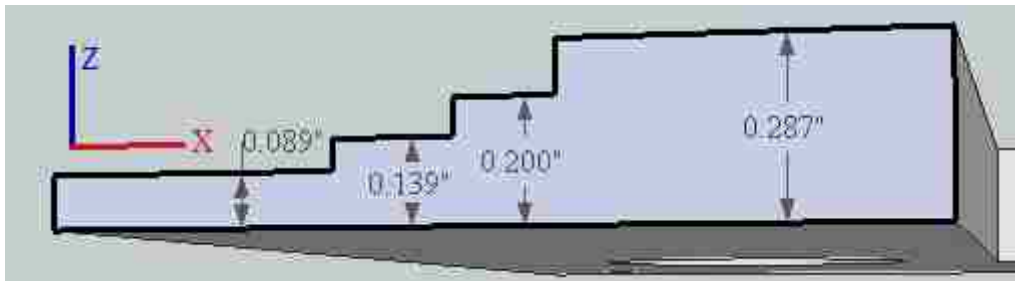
Cross sectional view of the 20x20 cm² lower trimmer lead plate in the cross-plane dimension illustrating the thickness values of the plate. The lower trimmer is square, such that all non-hole dimensions are equal in the in-plane and cross-plane dimensions.
